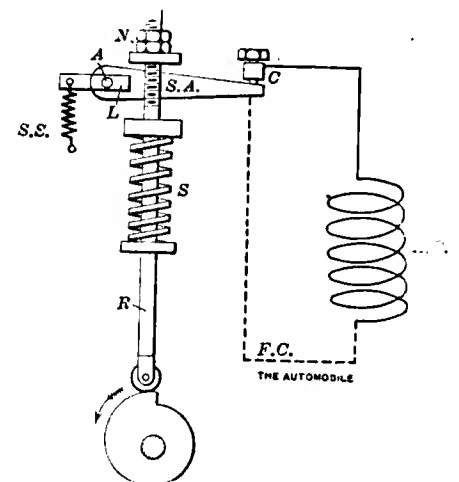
MECHANICAL BREAK ARRANGEMENT.
